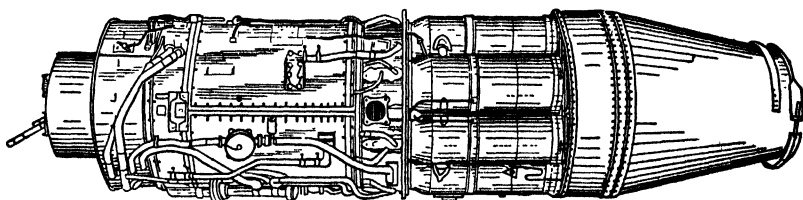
Exterior view of turbojet with axial-flow compressor. (Courtesy of General Electric Co.)
